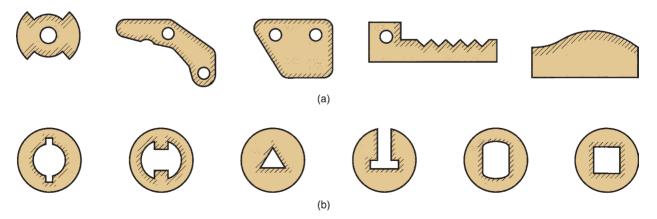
Work shapes that can be cut by: (a) external broaching, and (b) internal broaching. Cross-hatching indicates the surfaces broached.
